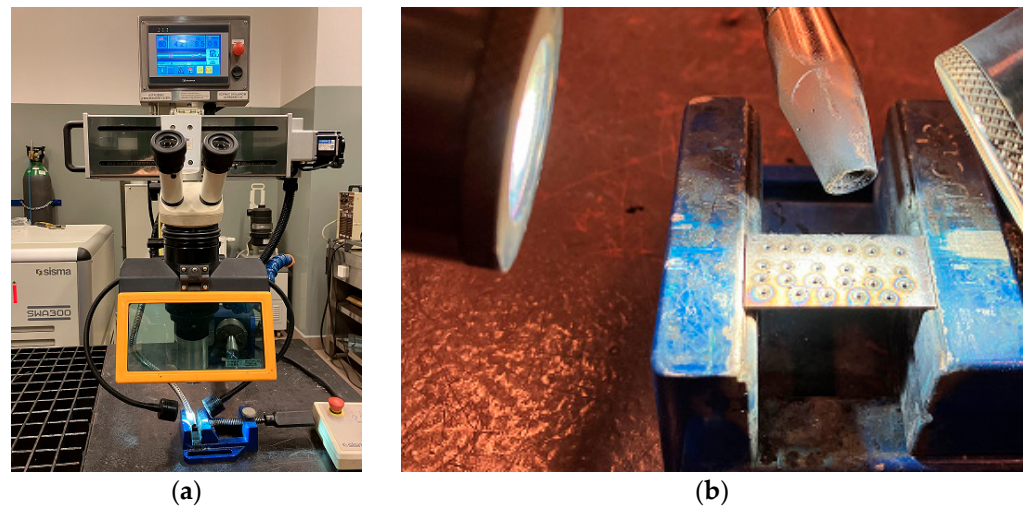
Laser drilling process: (a) Sisma SWA 300 semi-automatic laser welding machine and (b) the work space.
